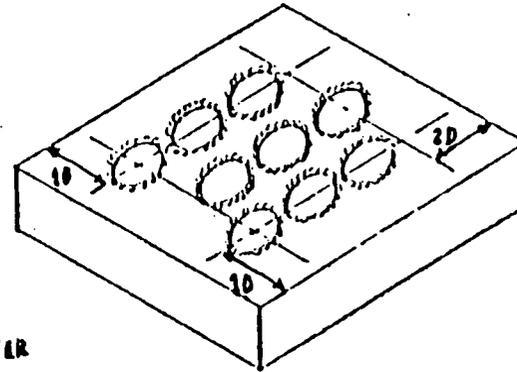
TEST ASSEMBLY FOR TRIANGULAR PITCH
